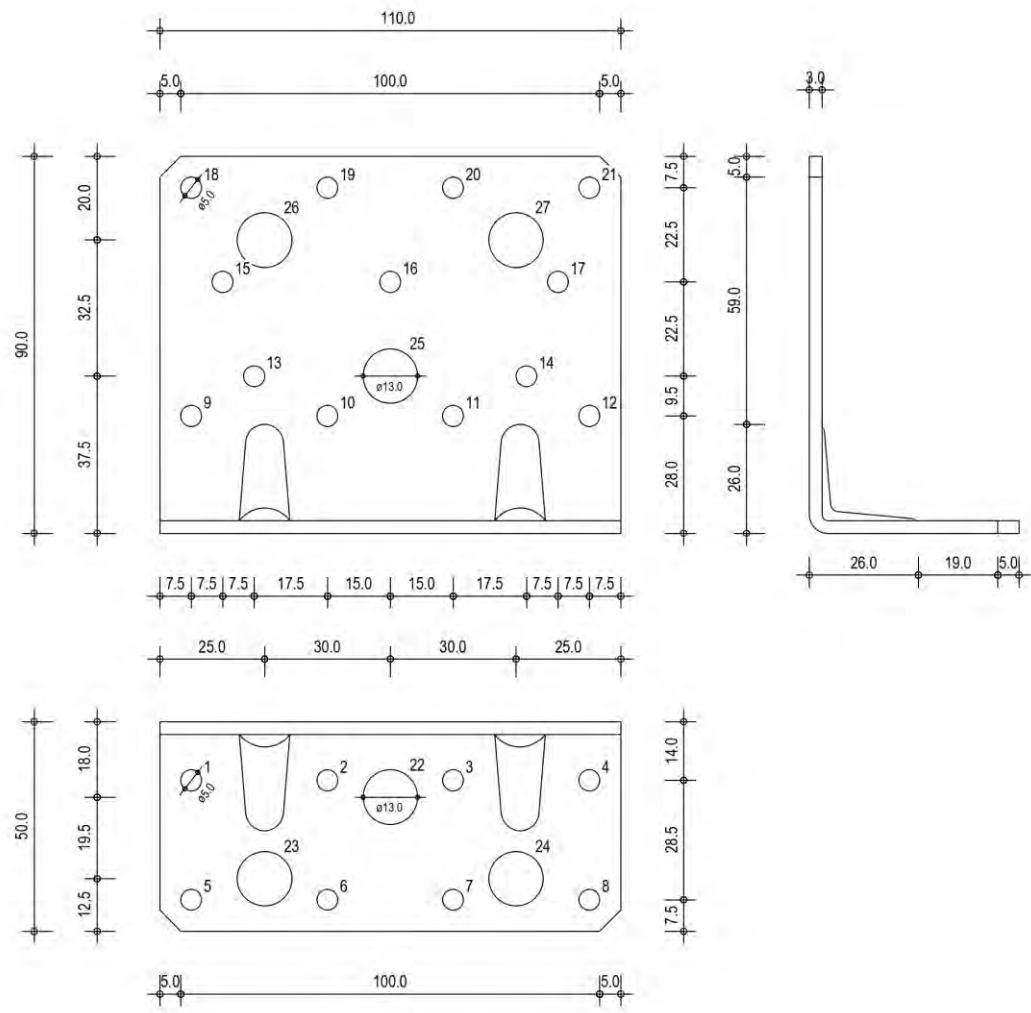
Dimensions of Angle Bracket 5911 and Washer 59114
